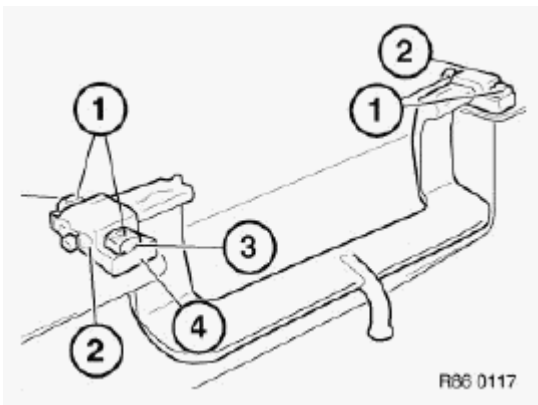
Identifying Square-Head Nut & Bearing Pedestal
